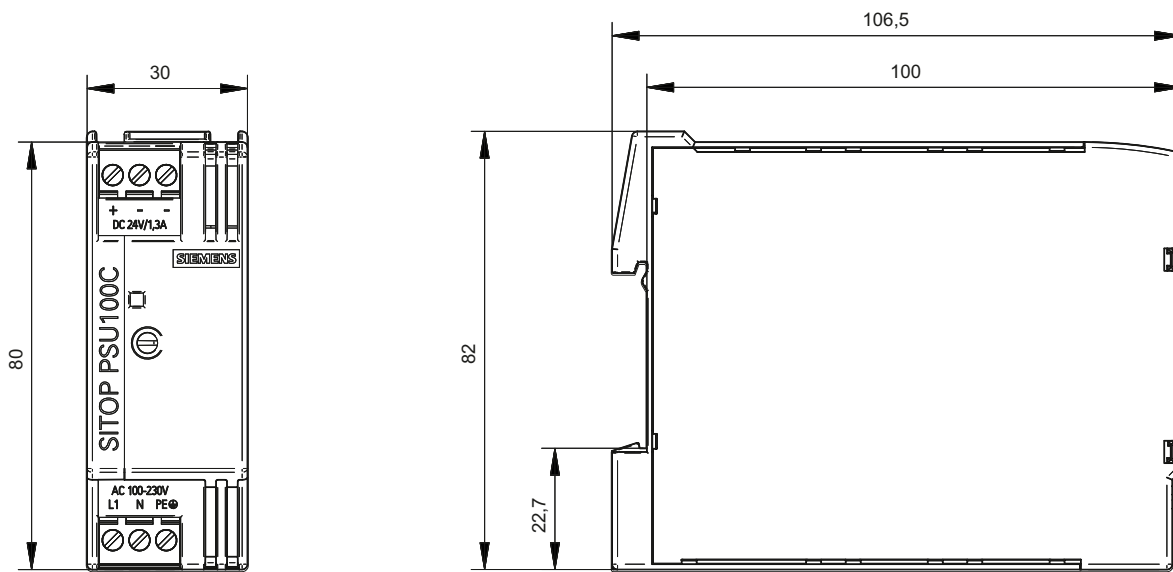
Dimension drawing 6EP1331-5BA10, 6EP1321-5BA00
